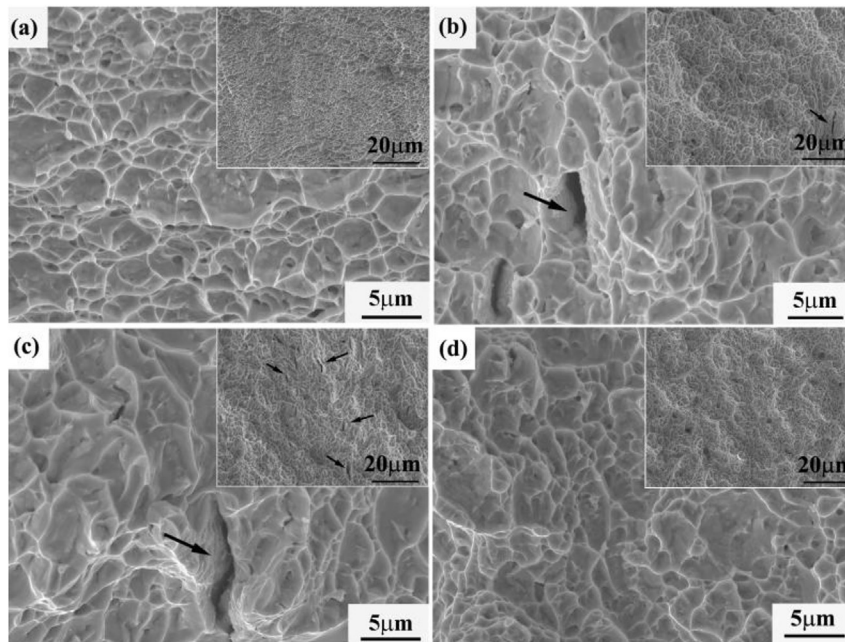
Cross-section fractographies of Zr-2.5Nb alloy: unannealed specimen (a) and specimen annealed at 700 °C (b) and 750 °C (c) and 850 °C (d). Note: the insets in the top right corner are low magnification versions of the fractographies, and the black arrow in (b) and (c) are secondary cracks.
